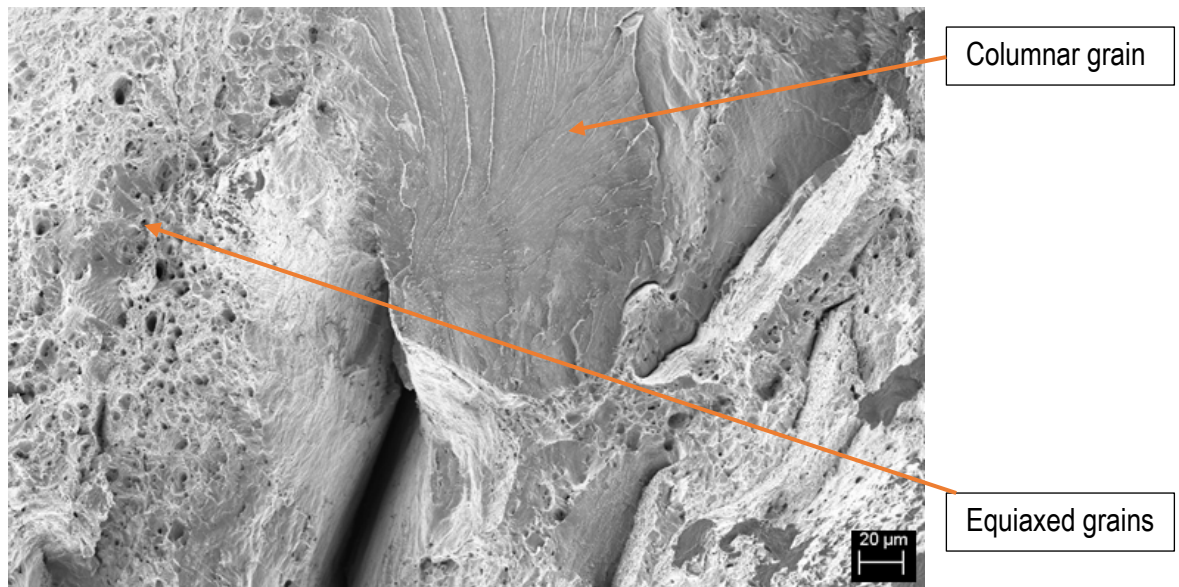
Scanning electron fractograph of a tensile coupon containing only weld metal in Grade 441. Ductile dimples, cleavage fracture and intergranular fracture was observed. (Weld ID: BC12010, with an electrode tip angle of 30°, pulse frequency of 25Hz, peak welding current of 120A and a welding speed of 10 mm/s. The sample had 53% equiaxed grains and a 23% elongation).
